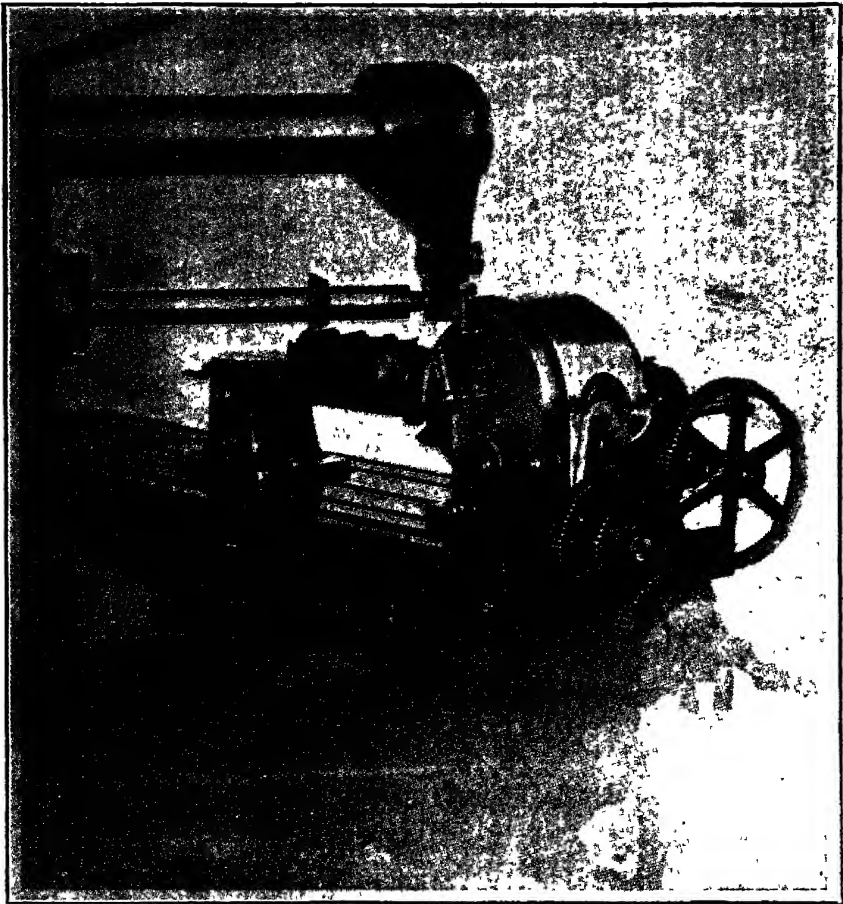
MILLING SPIRAL CUTTER ON UNIVERSAL MACHINE
